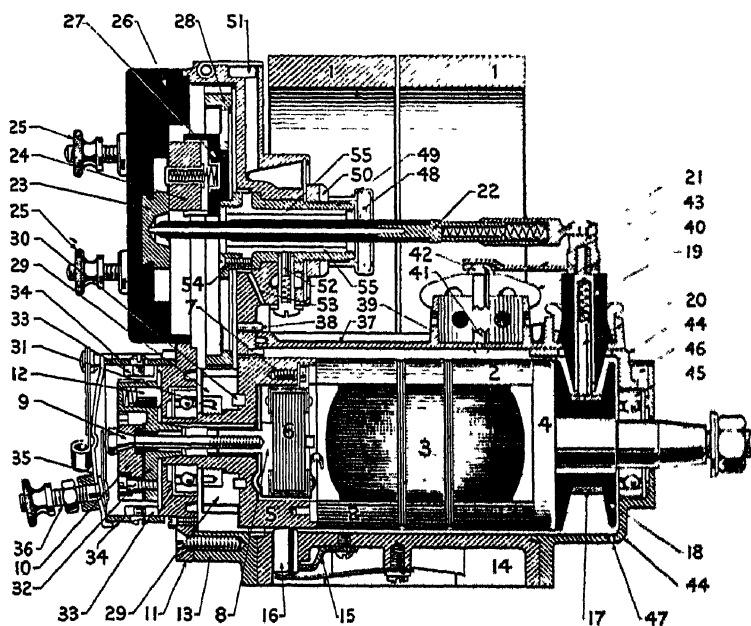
Sectional view of Bosch magneto, model DU4, showing construction.
